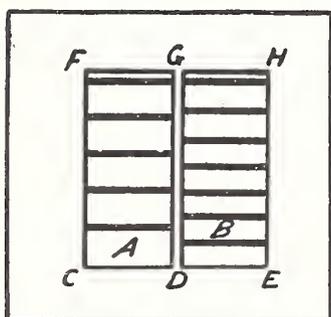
Test for parallelism of gage surfaces. B shorter at GH than DE
